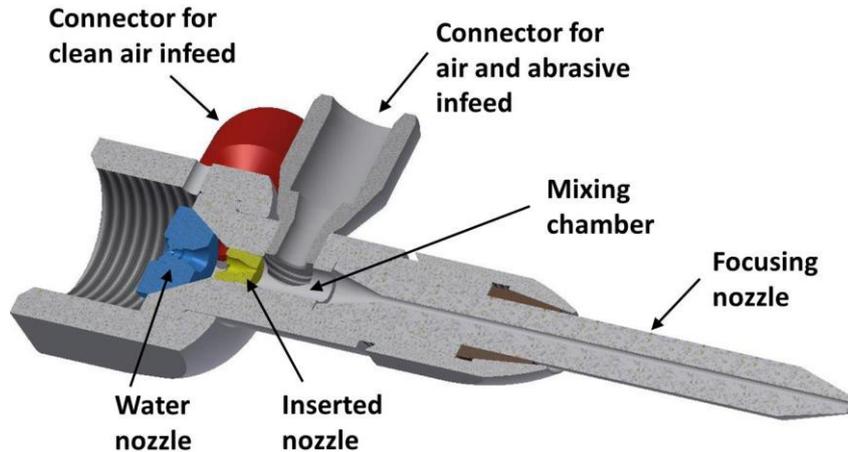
CAD model of a modified abrasive head with inserted nozzle and clean air infeed (Source: Model by Z. Říha, Institute of Geonics)
